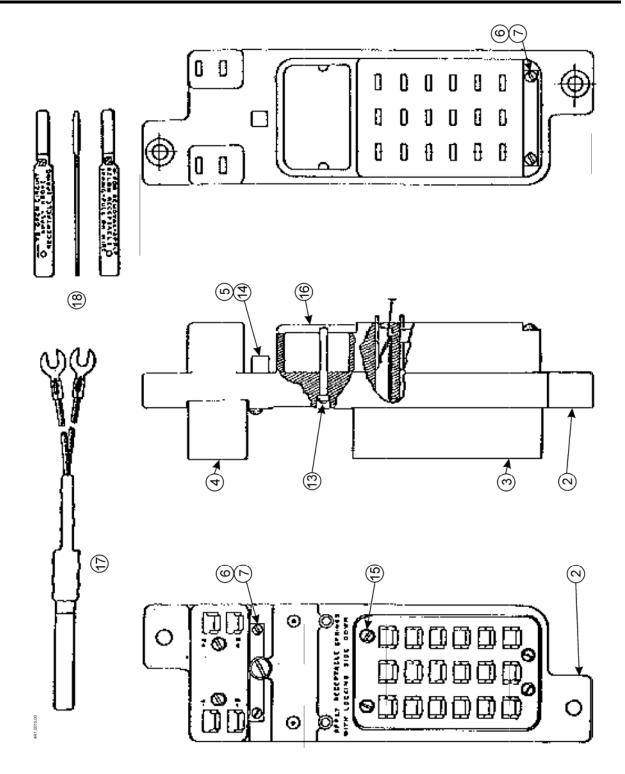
Old Style Mounting Base for PP-151 Relays
